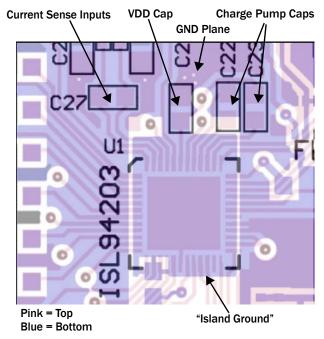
EXAMPLE 4-LAYER PCB LAYOUT FOR VDD BYPASS, CHARGE PUMP and CURRENT SENSE.
